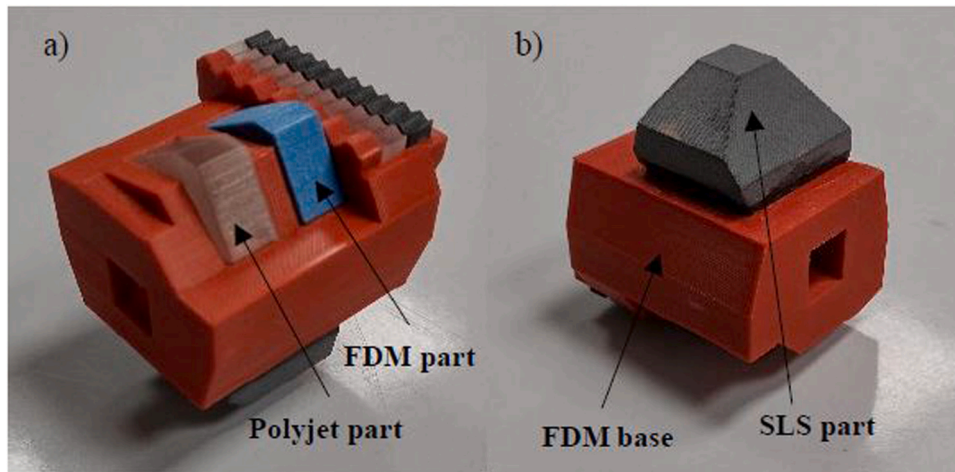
Designed assembly. a) Upper view. b) Lower view.
